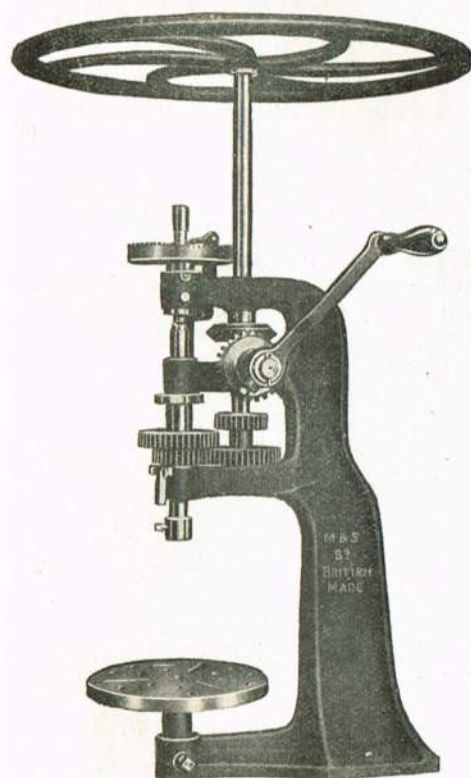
The Richmond Improved Design Bench Drilling Machine. Fitted with self-acting feed motion. Spindle thrust taken on ball thrust race. The machine body can be moved forward on baseplate, to enable large work to be drilled from floor. The Spindle takes  $\frac{3}{8}$ " parallel shank drills. The table can easily be removed from the socket and a self-centering vice placed in position. Width of jaws, 4 inches; maximum distance between jaws, 4 inches.
